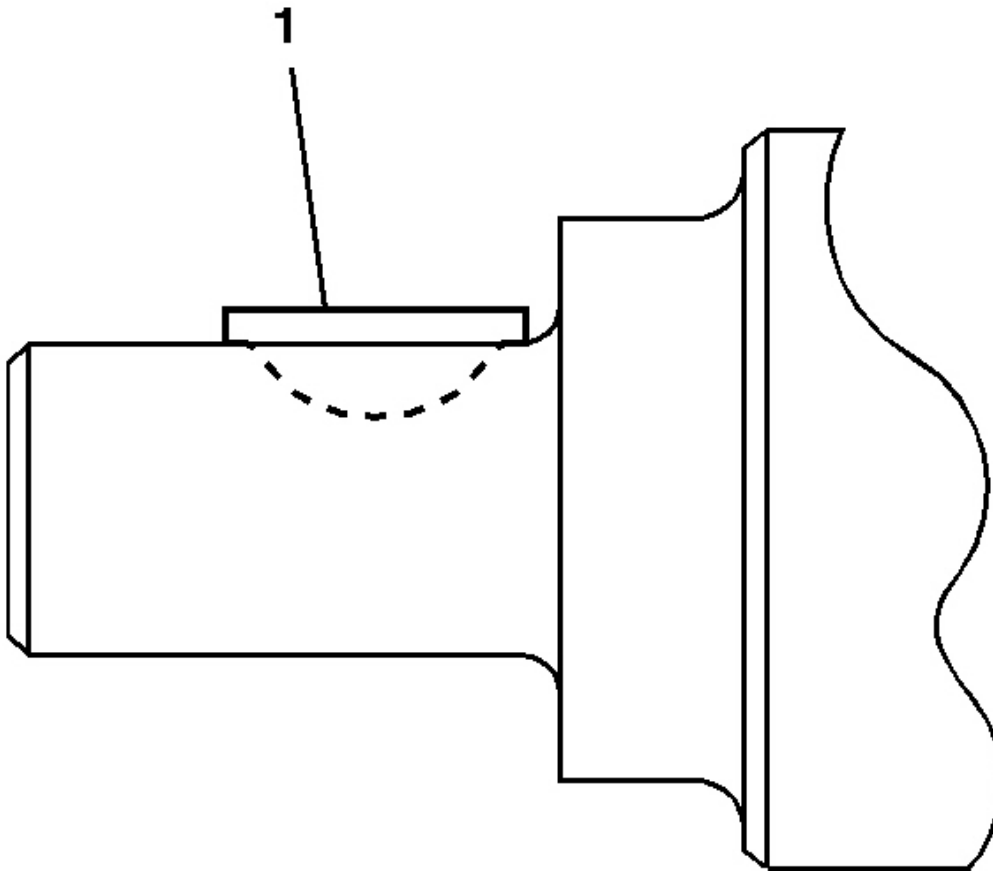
View Of Crankshaft Sprocket Key Installation Position
